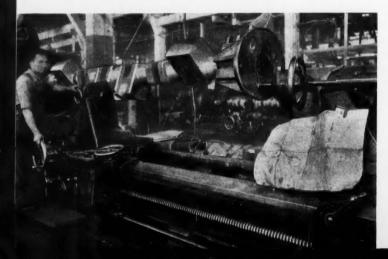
Turning the Crankpins and Jou-nals on a Crankshaft for a 900 H.P. Atlas Imperial Diesel Engine
